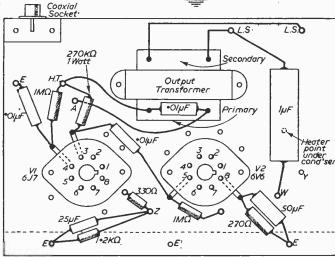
(Above).-Layout of the L parts. Fig. 3 (Below, right).--Mounting the controls on the panel.
